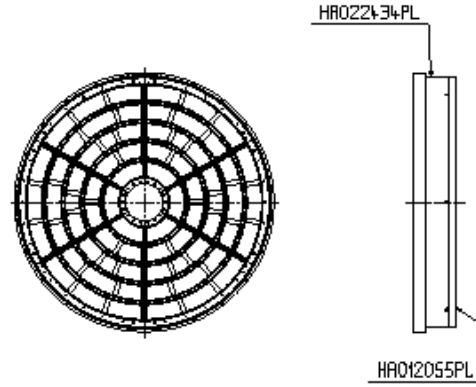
Pad plane support, top view (left) and side view (right).
